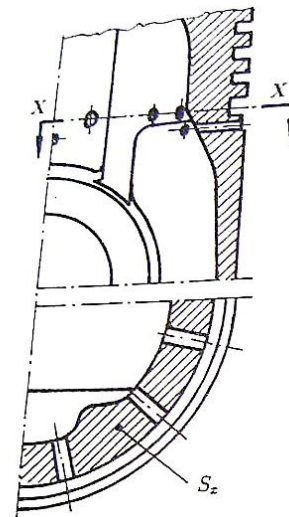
SECTION VIEW OF PISTON AT OIL RING LOCATION
